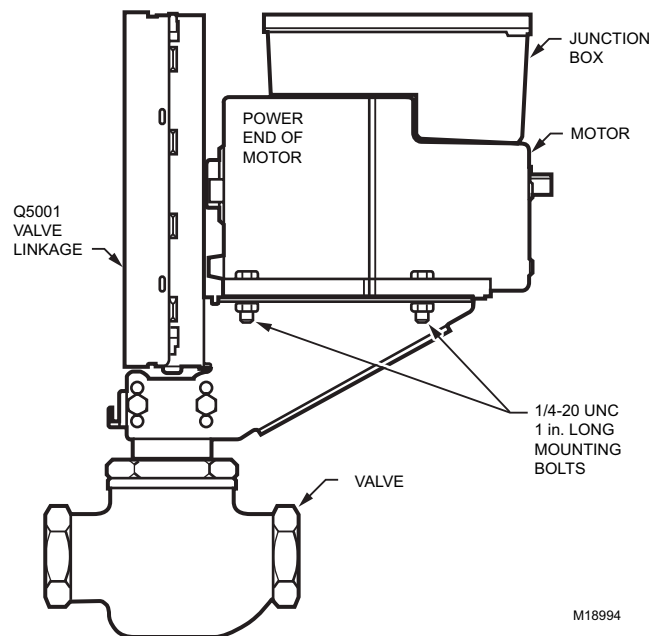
Mounting the motor on a Q5001 Valve Linkage.
